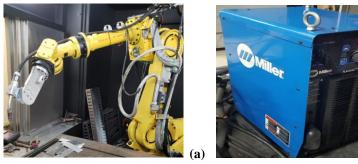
(a) Robot Fanuce R2000 (b) Miller Auto Axces 750
